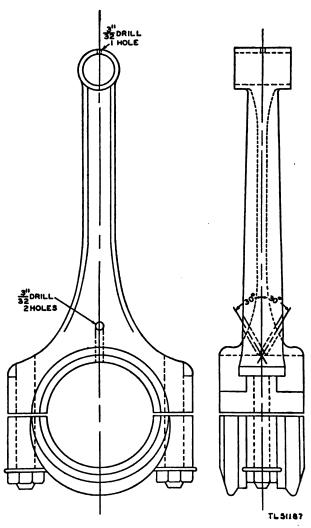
Briggs and Stratton connecting rod after oil holes have been drilled.
